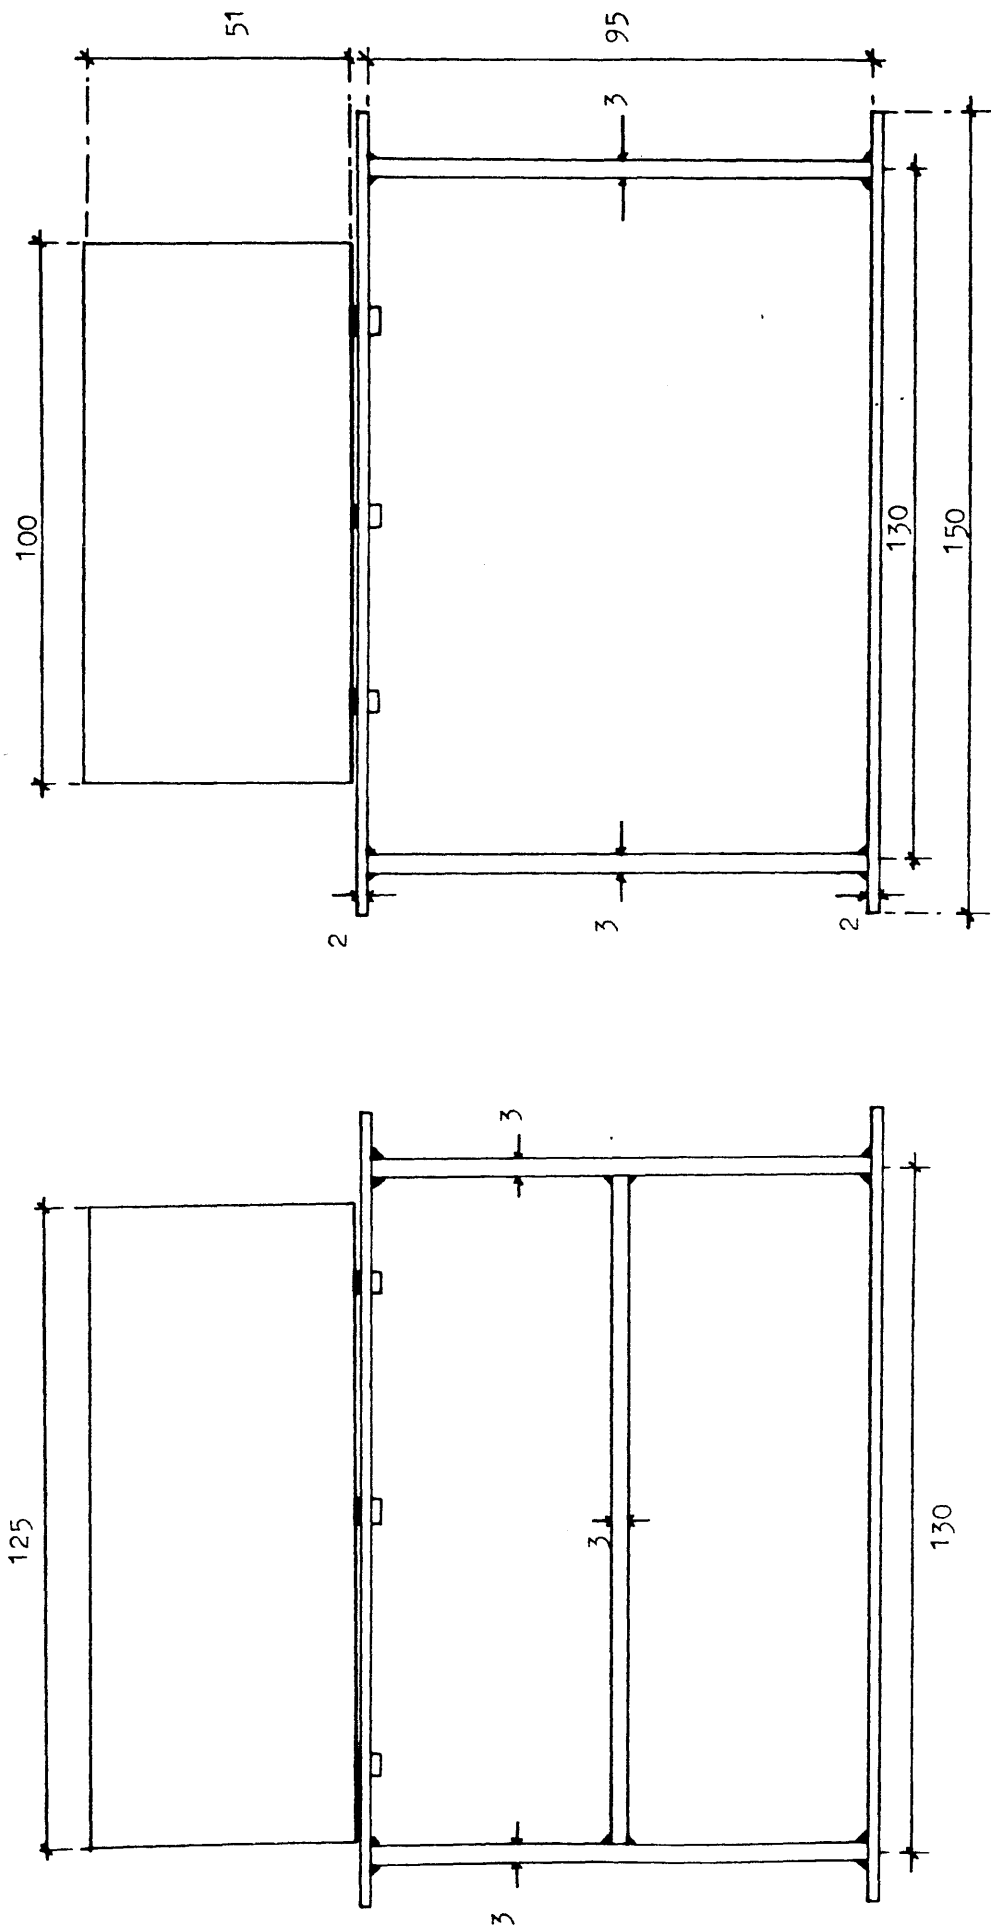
FRONT AND SIDE ELEVATIONS OF MODEL ' B '
